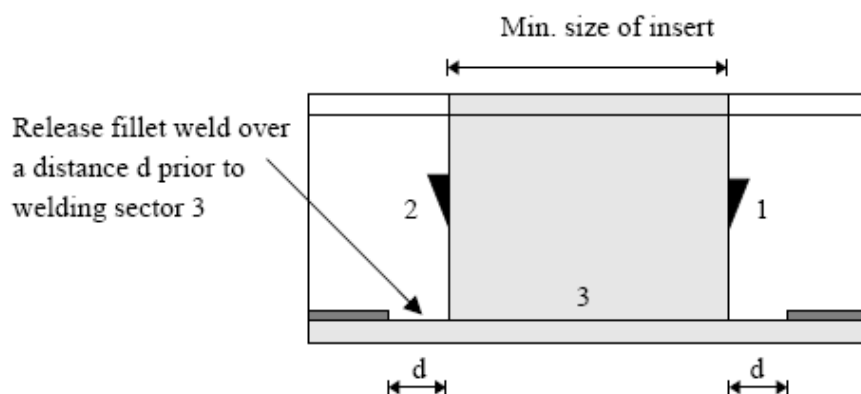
Welding sequence for inserts of stiffeners
